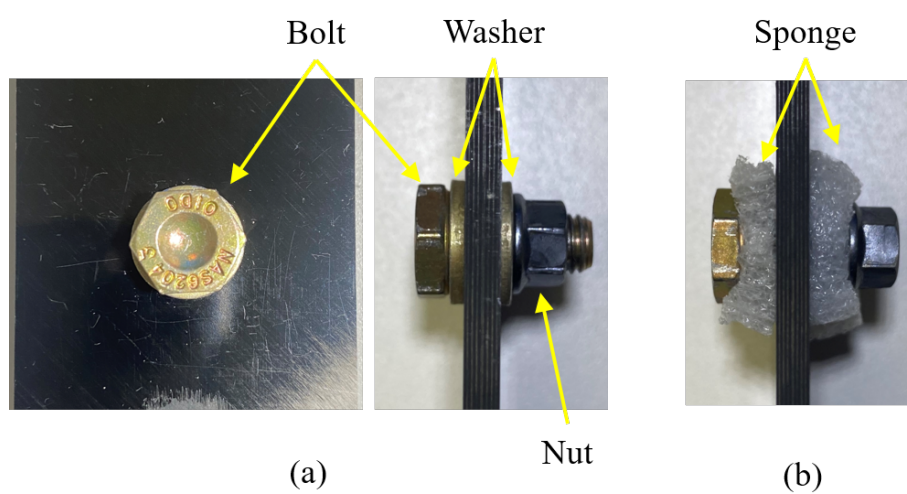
Fastener used in (a) FHT specimen and (b) PIN-FHT specimen.
